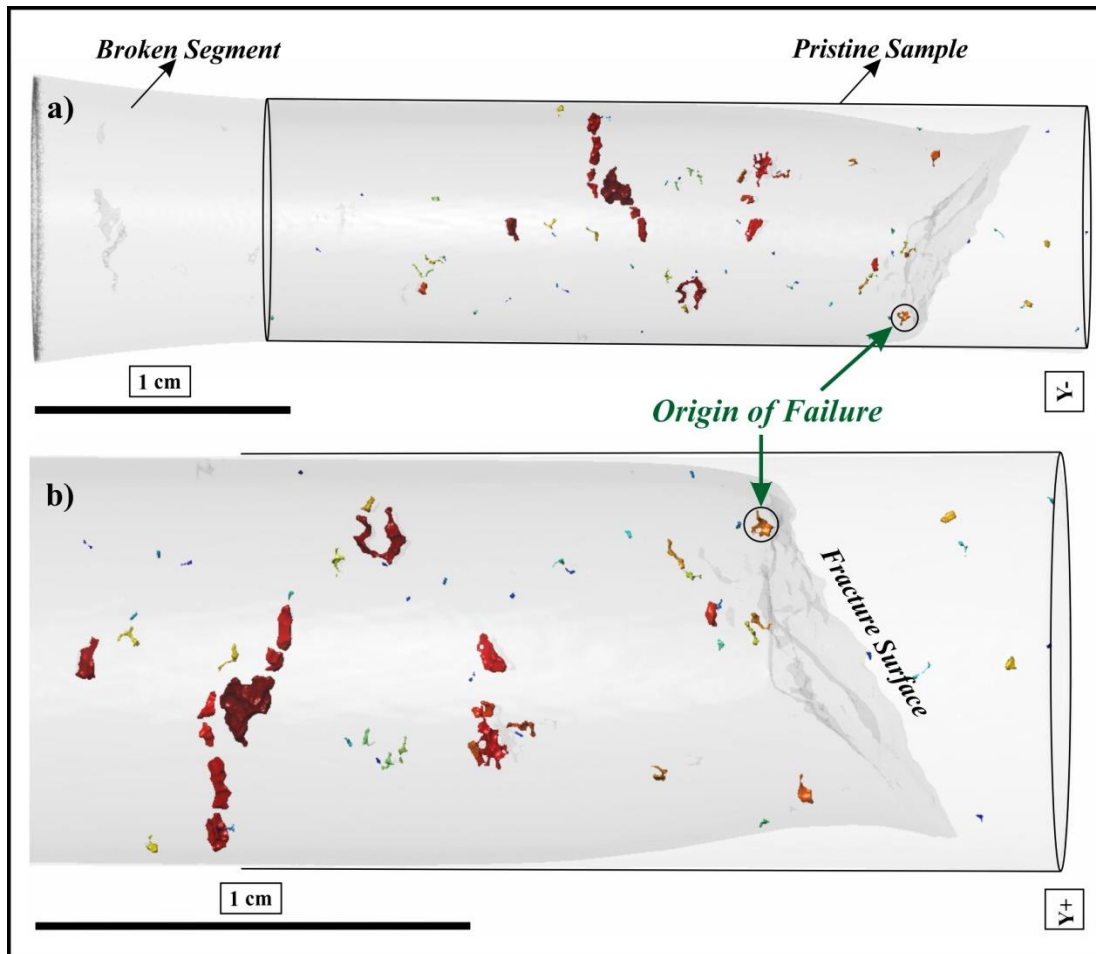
(a), (b) 3D illustration of one of the broken parts overlapped with the fatigue sample gauge length in different magnifications
